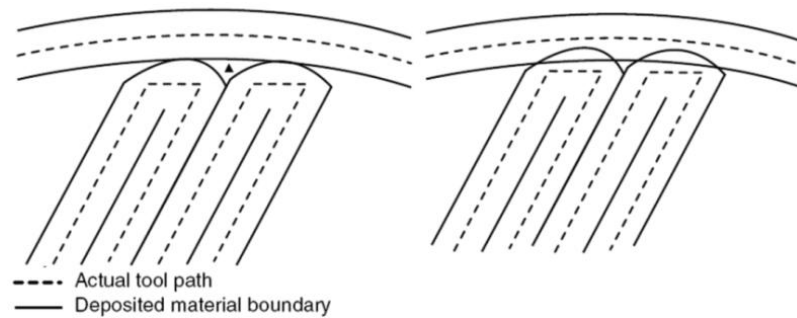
The printing path: actual tool path and the printed material boundary.
